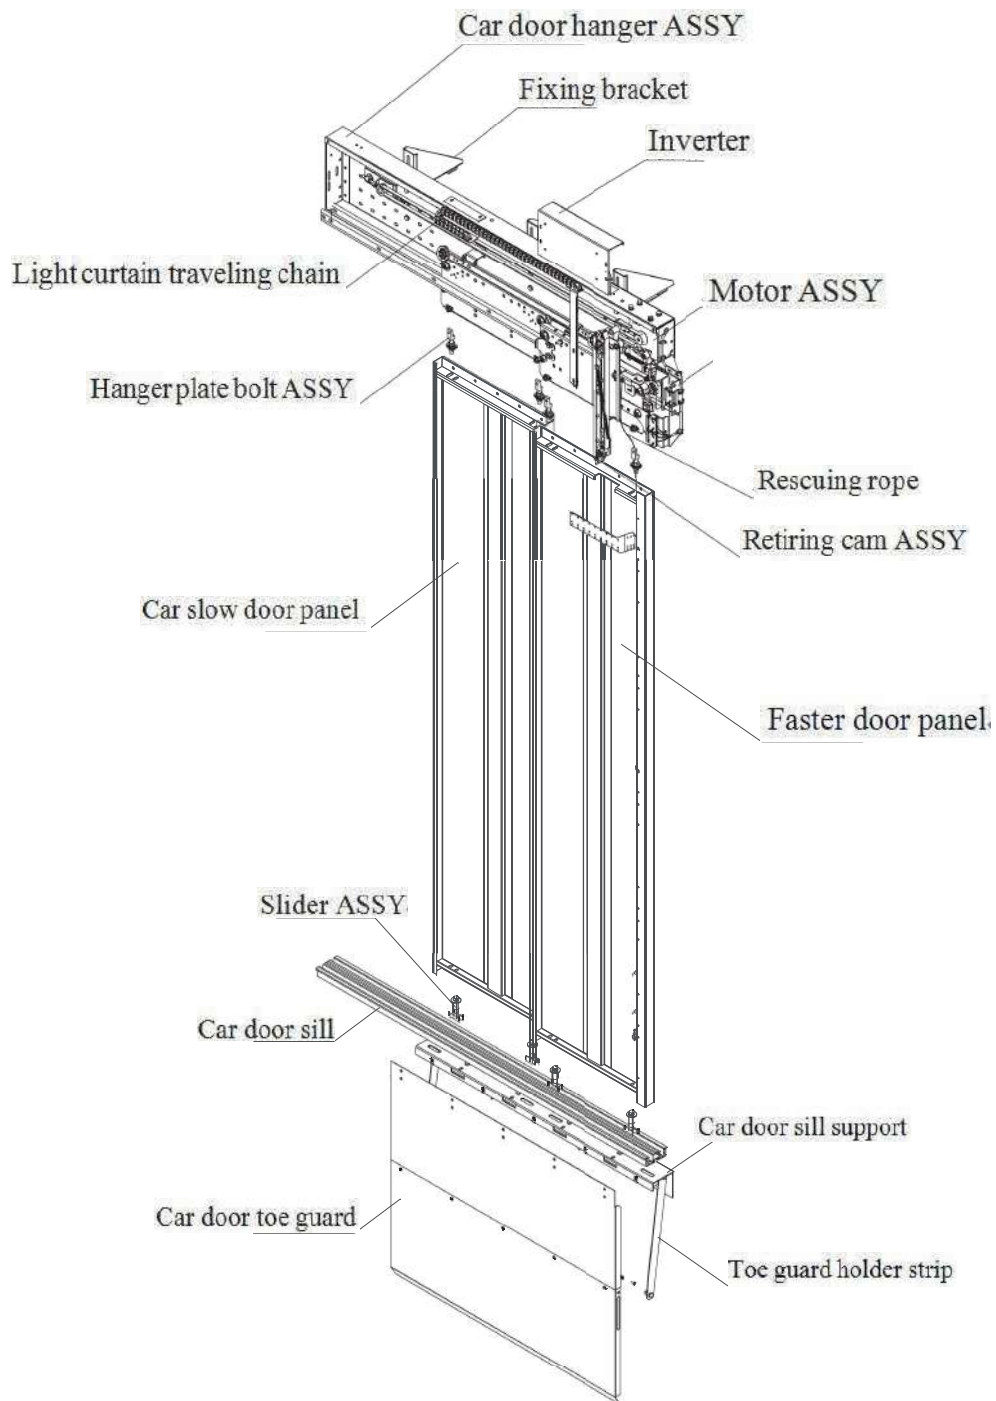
Assembly Drawing of AC Permanent-magnet Synchronous car door
